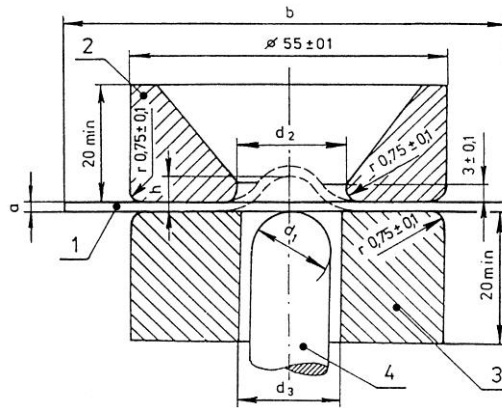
Scheme of operating area of testing device (1 – test specimen, 2 – die, 3 – blankholder, 4 – punch, d_1 – punch spherical end diameter, d_2 – die internal diameter, d_3 – holding ring internal diameter, b – test specimen width, h – cavity depth).
